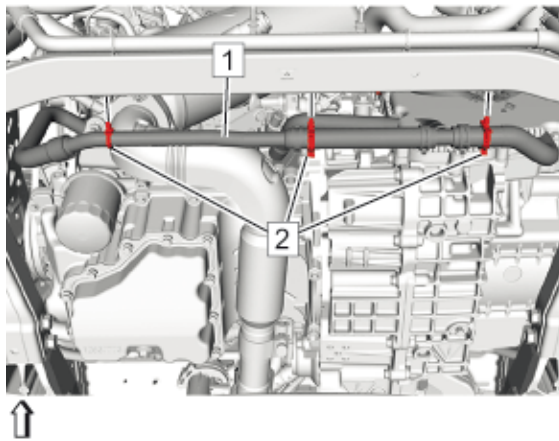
Heater Water Auxiliary Pump Inlet Hose And Clamps
